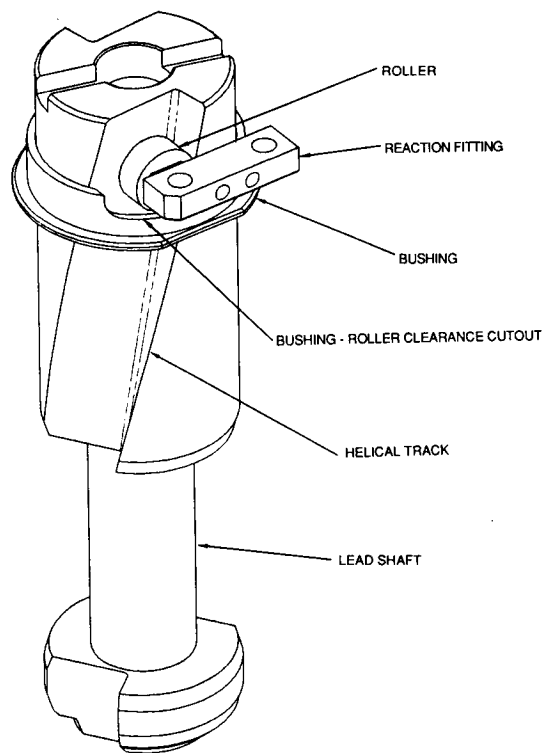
LEAD SHAFT - BUSHING - ROLLER ARRANGEMENT
